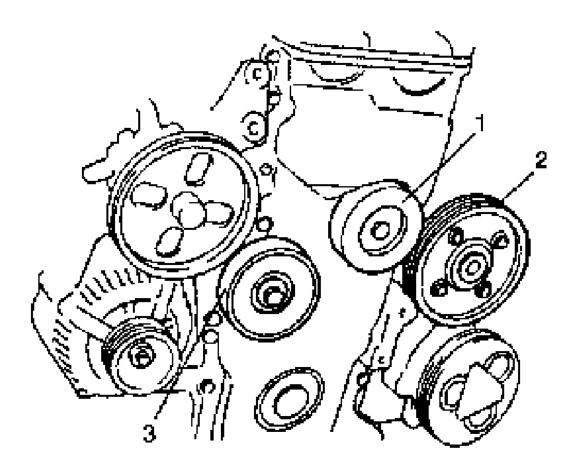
Removing Generator Belt Idler Pulley Courtesy of SUZUKI OF AMERICA CORP.
